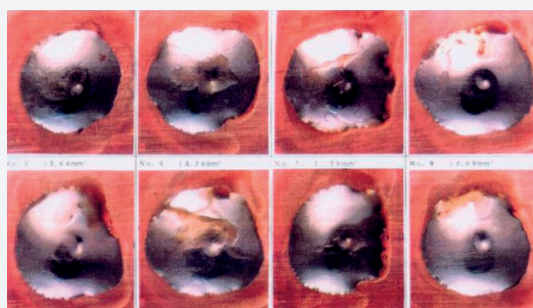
On the left side: Soldering points of conventional solder wire with flux core containing air pockets. Right side: Solder points of Almit solder wire with 100% continuous flux core without air pockets.
